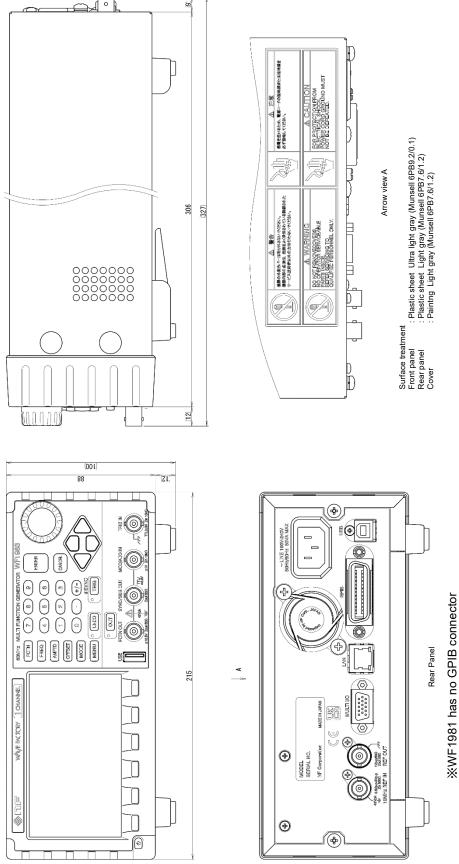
Outline dimensional drawing (WF1983/WF1981)
